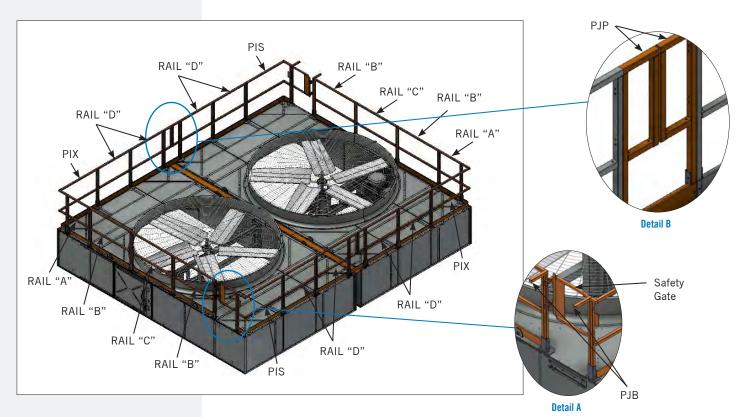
Top Perimeter Guardrails - PFi/PCC-2418, 2420
